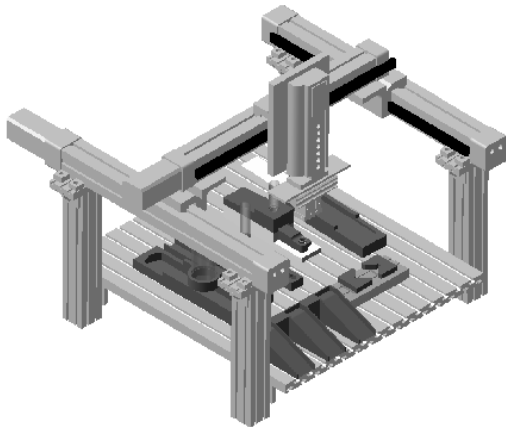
Design of Cartesian robot for assembly and disassembly process
